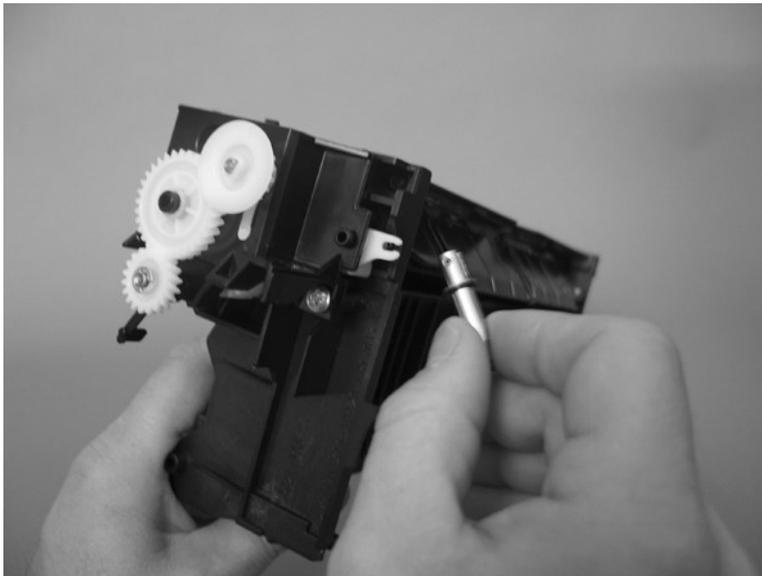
Remove the delivery assembly (M680; 4 of 4)
